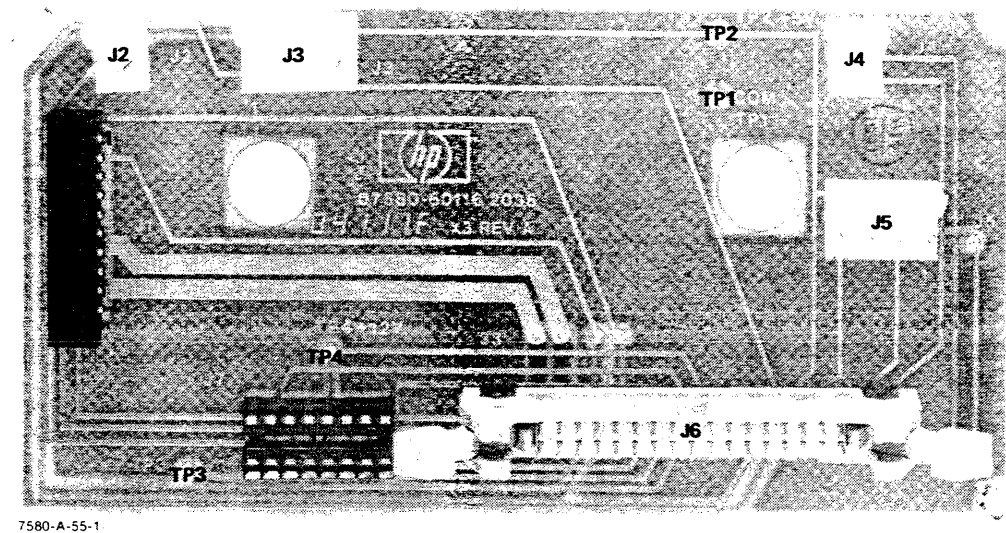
Motor Drive Transistor PCA A9, Component Identification Diagram 6-59/60A
